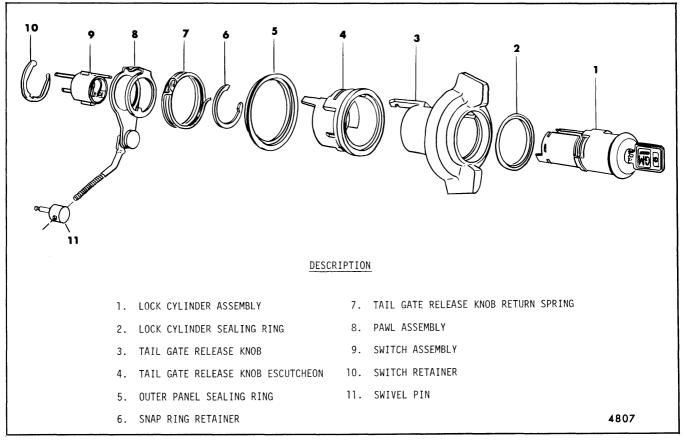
Manual Tail Gate Lock and Release Switch Assembly
